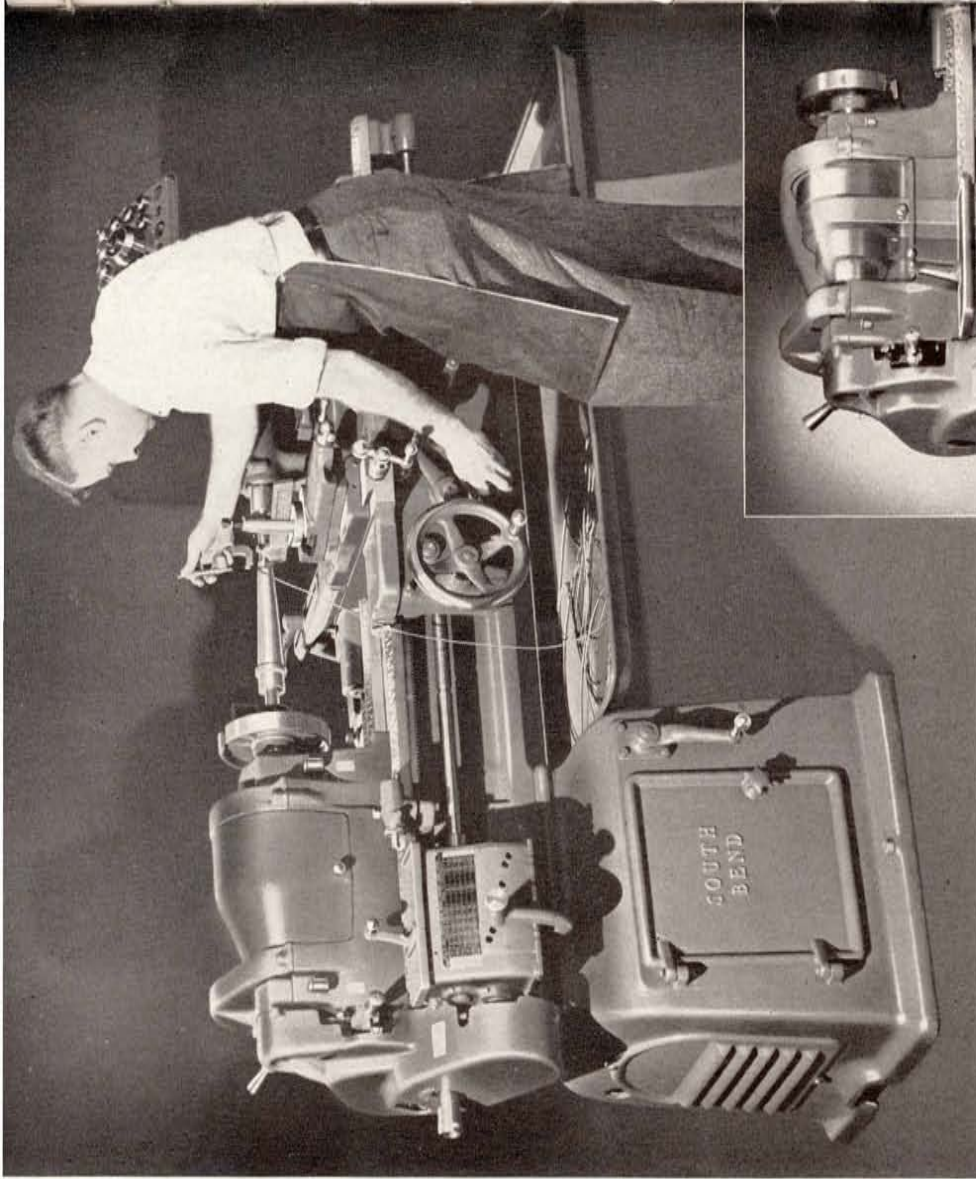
Above—Underneath Belt Motor Driven Lathe (Patented)
